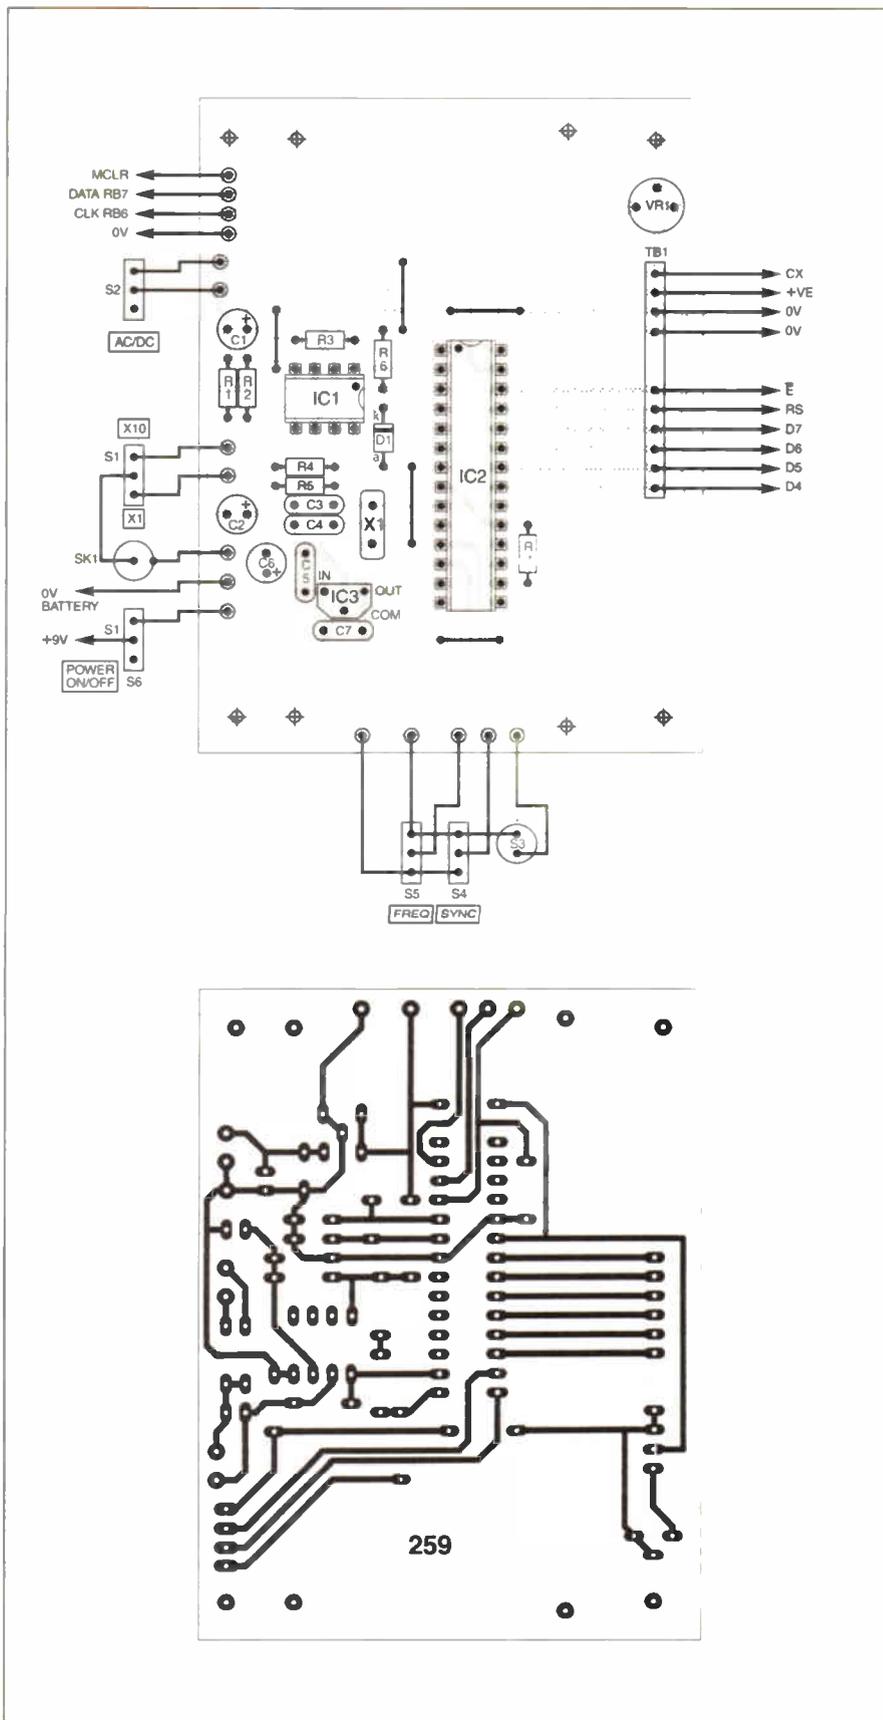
Printed circuit board component layout, wiring to the off-board components and full-size copper foil master for the Micro-PICscope.
